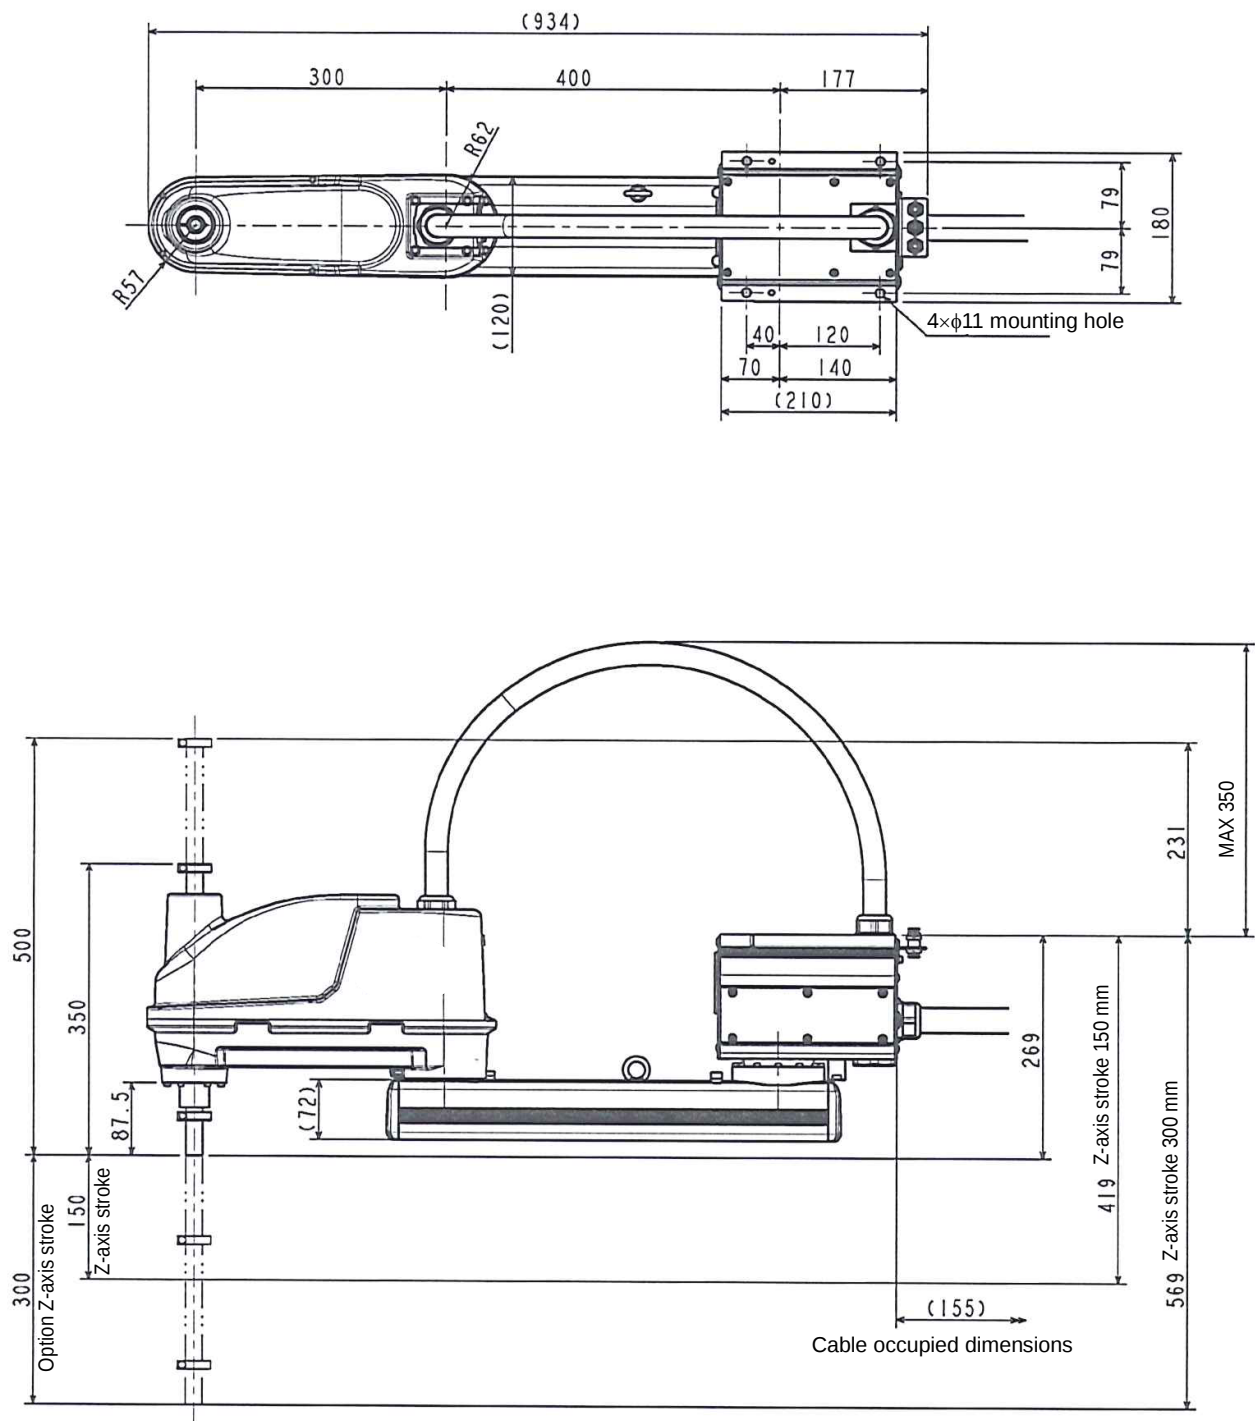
Outer dimensions of the robot (KHL-600-T)
